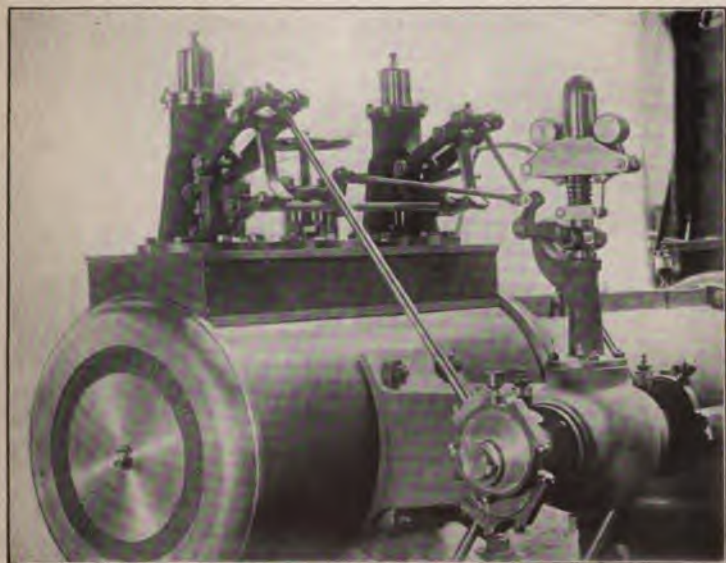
B.—Trip-valve Gear and Governor, made by Easton & Bessemer.
